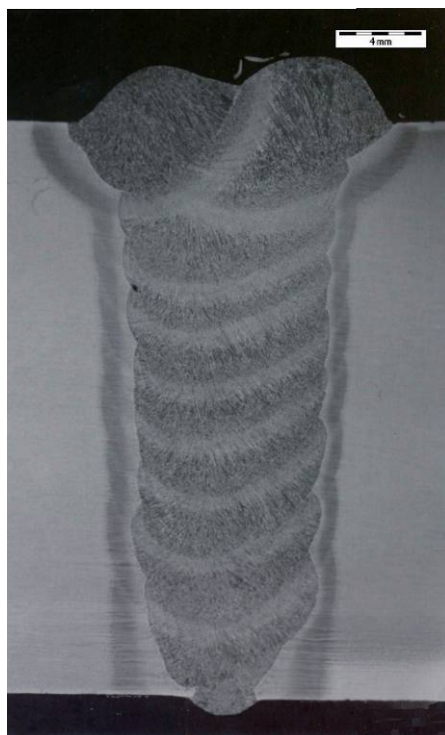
Image of a typical steel catenary riser girth weld produced using mechanised welding processes.
